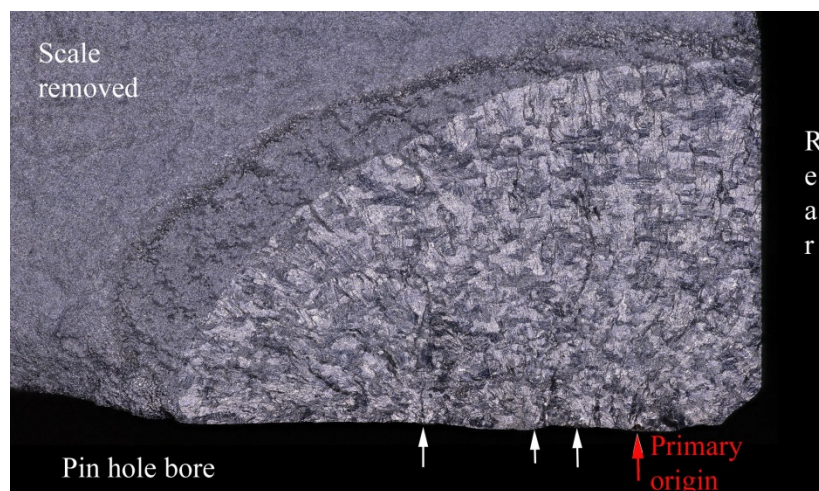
Showing a typical opened fatigue crack surface. Fatigue origins are arrowed, with the primary in red. The origins are also co-located with dark spots of transferred copper material on the pin hole bore, with migrated copper locally on the open crack surface
